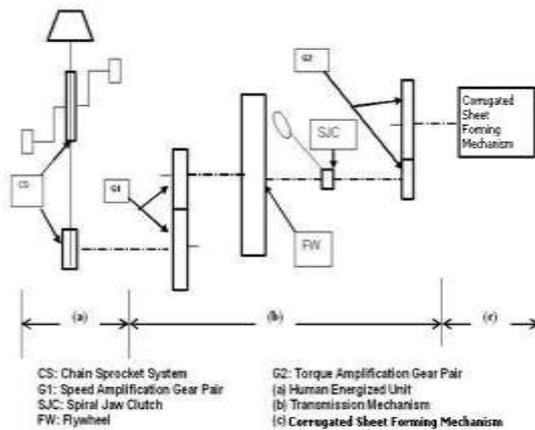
Schematic diagram of proposed mechanism for corrugated paper sheet making mechanism.
